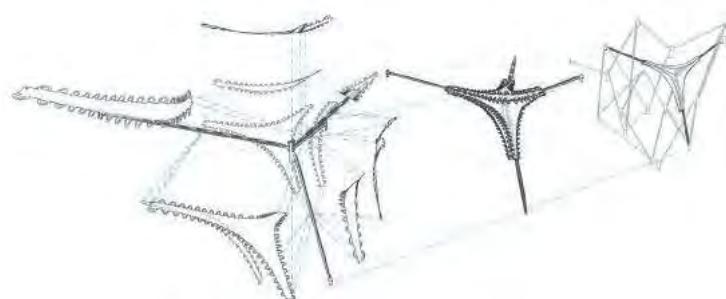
Cast Thicket: exploded axonometric drawing describing assembly process.
